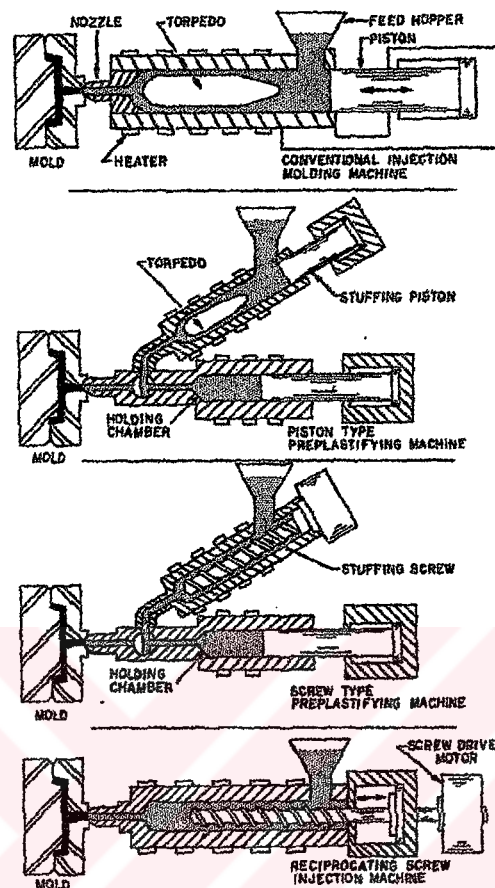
Four Basic Types of Injection Moulding Equipment.
